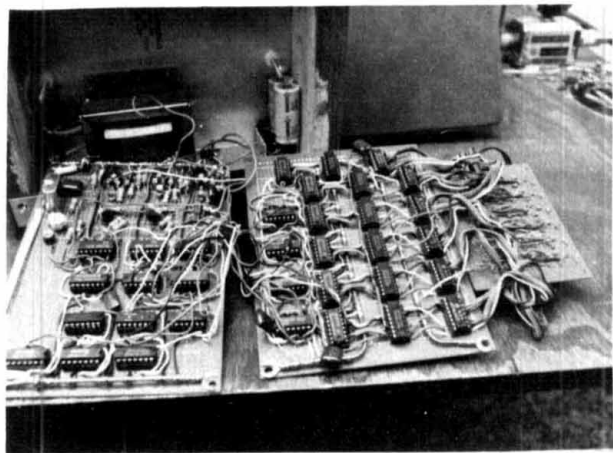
Photo A. The top, bottom, and digit boards (left to right), are shown interconnected and ready for mounting.
